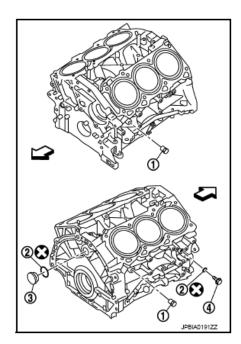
Identifying Drain Plugs And Washer Of Cylinder Block Courtesy of NISSAN MOTOR CO., U.S.A.
